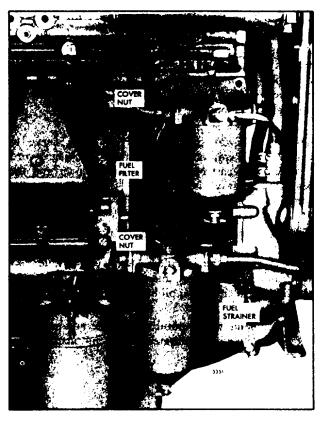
Typical Fuel Strainer and Filter Mounting
